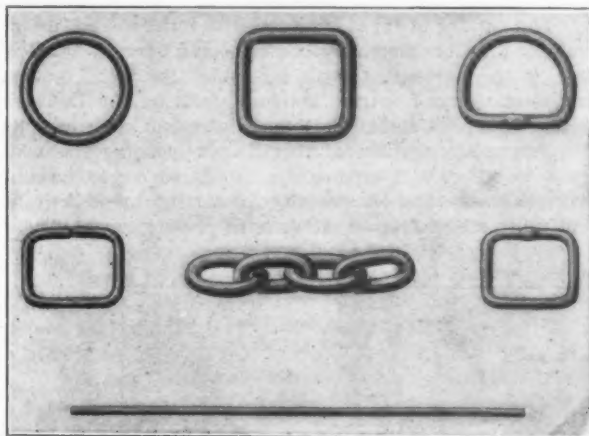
Miscellaneous Welds in Different Shapes Made by the Giraud Welders.
